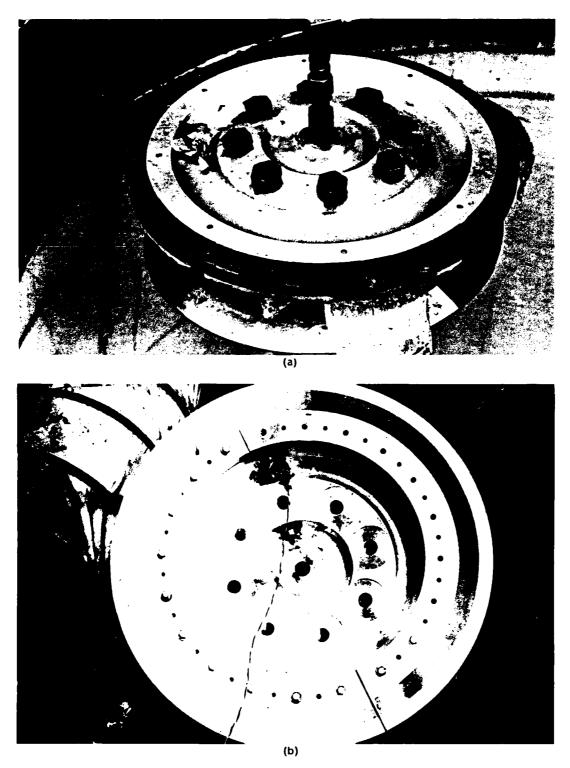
Undamaged aluminum penetration plate. (a) Top view. (b) Bottom view.
